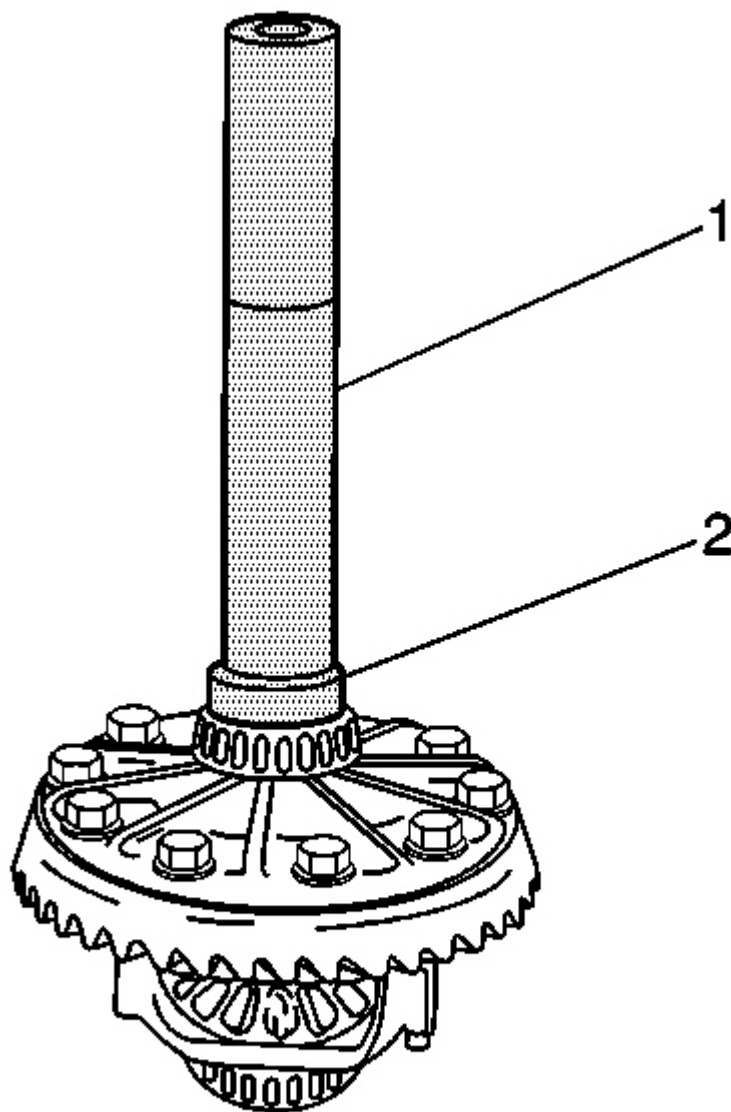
Driving The Differential Case Bearing Onto The Case Using J 8092 & J 33790 (8.25 Inch Axle)
